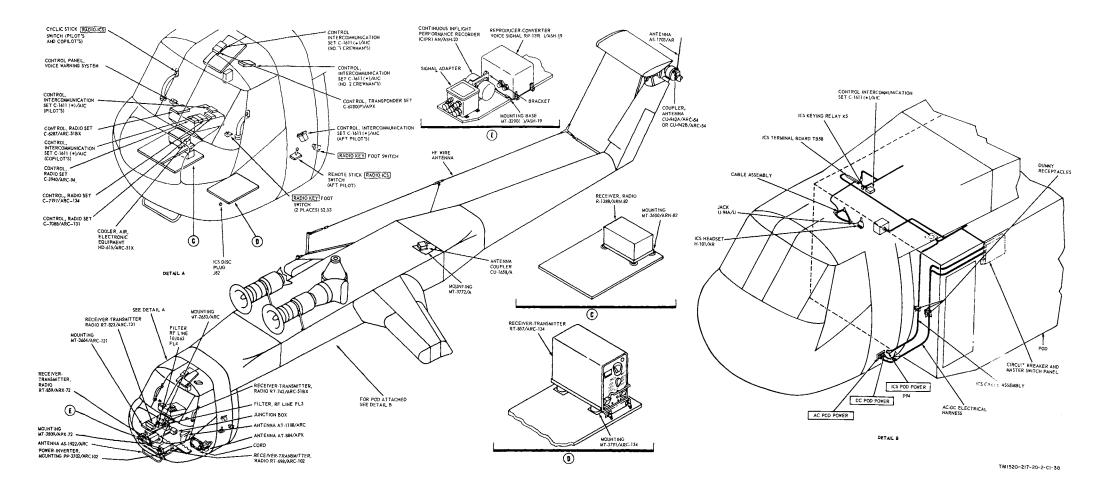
Outline drawing of helicopter, showing relative location of communication, identification, interphone, and voice warning equipment components.
